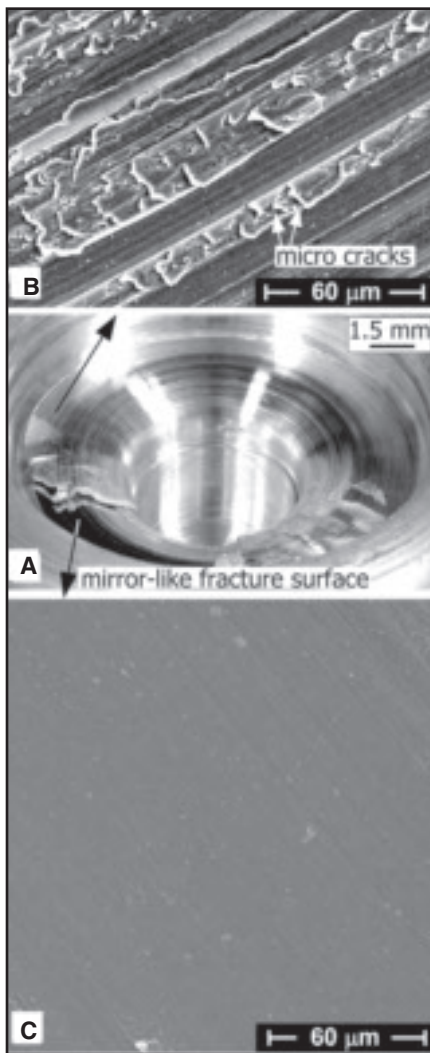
Mirror-like fracture surface. A — Overview; B — SEM image showing tool-shoulder tracks on weld surface; C — SEM image showing smoothness of mirror-like fracture surface.
